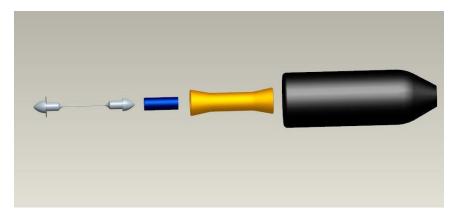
All 5 parts of the engine (Photo by Doug Carlock, Vanderbilt University).
